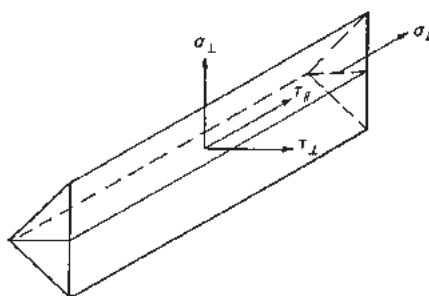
Stresses on the throat section of a fillet weld
